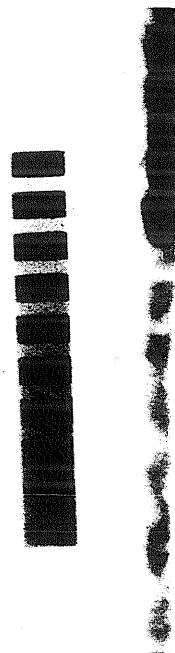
RADIOGRAPHS OF COPPER JOINTS WELDED BY THE SHIELDED-ARC PROCESS, SERIES II
